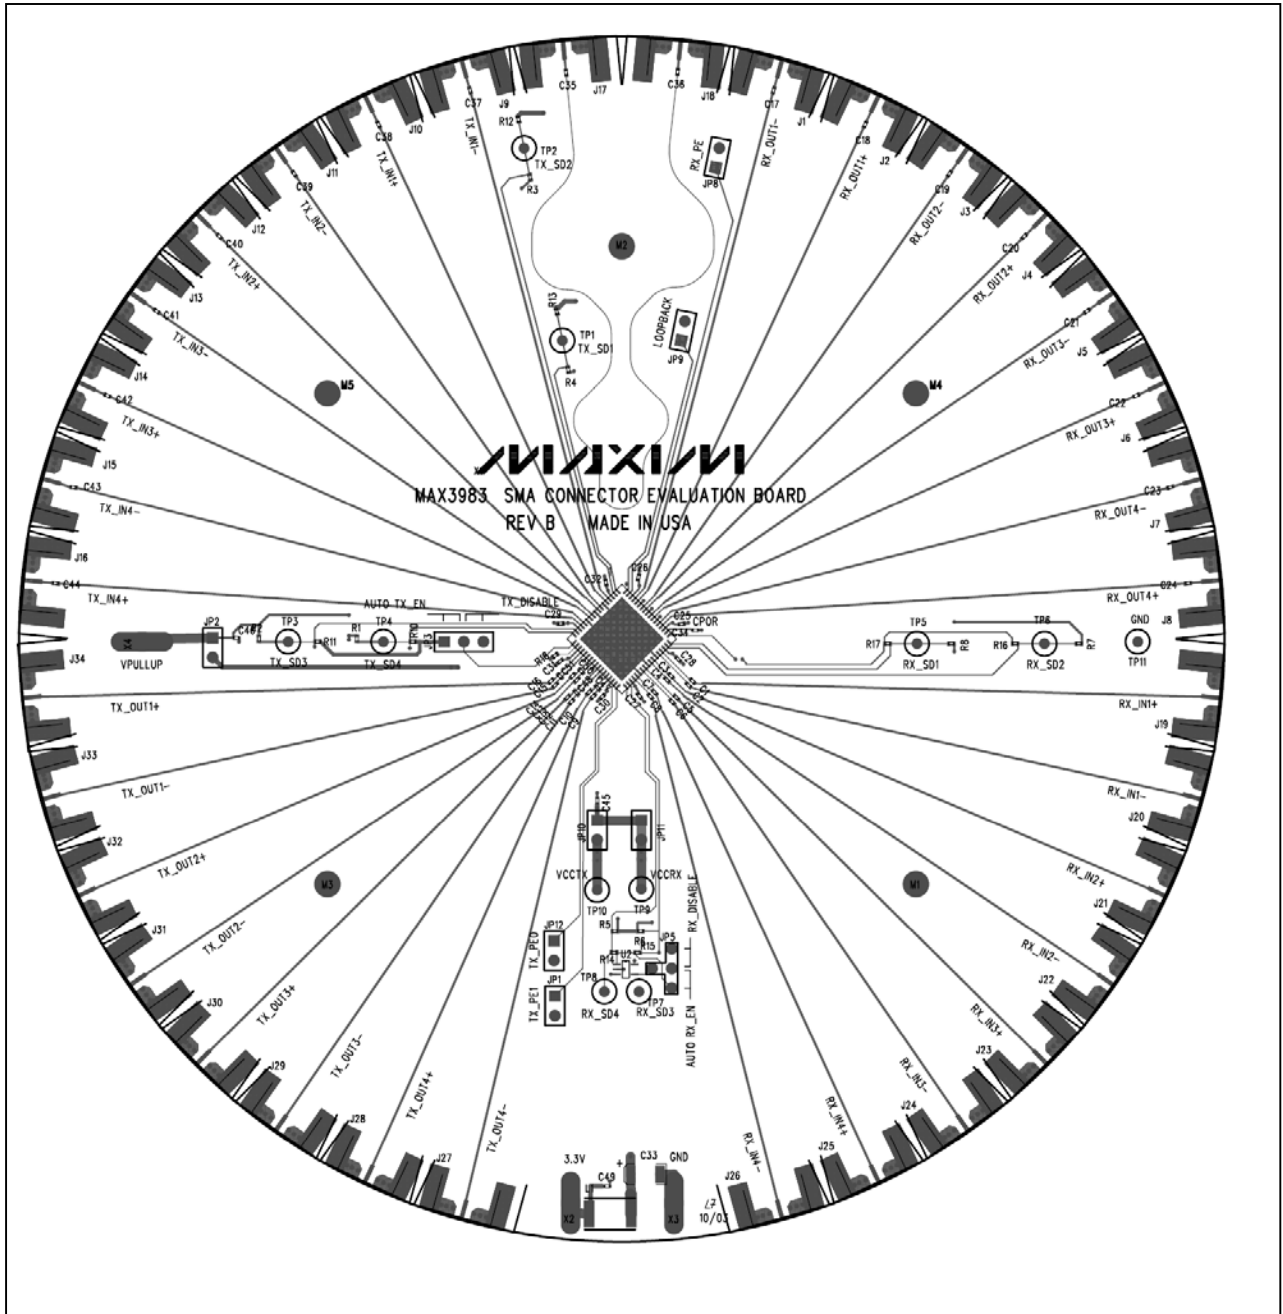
MAX3983 SMA Connector EV Kit Component Placement Guide – Component Side
